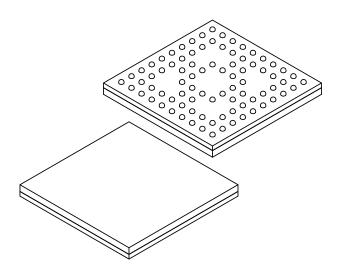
2ZW Package Dimensions, Sheet 2
